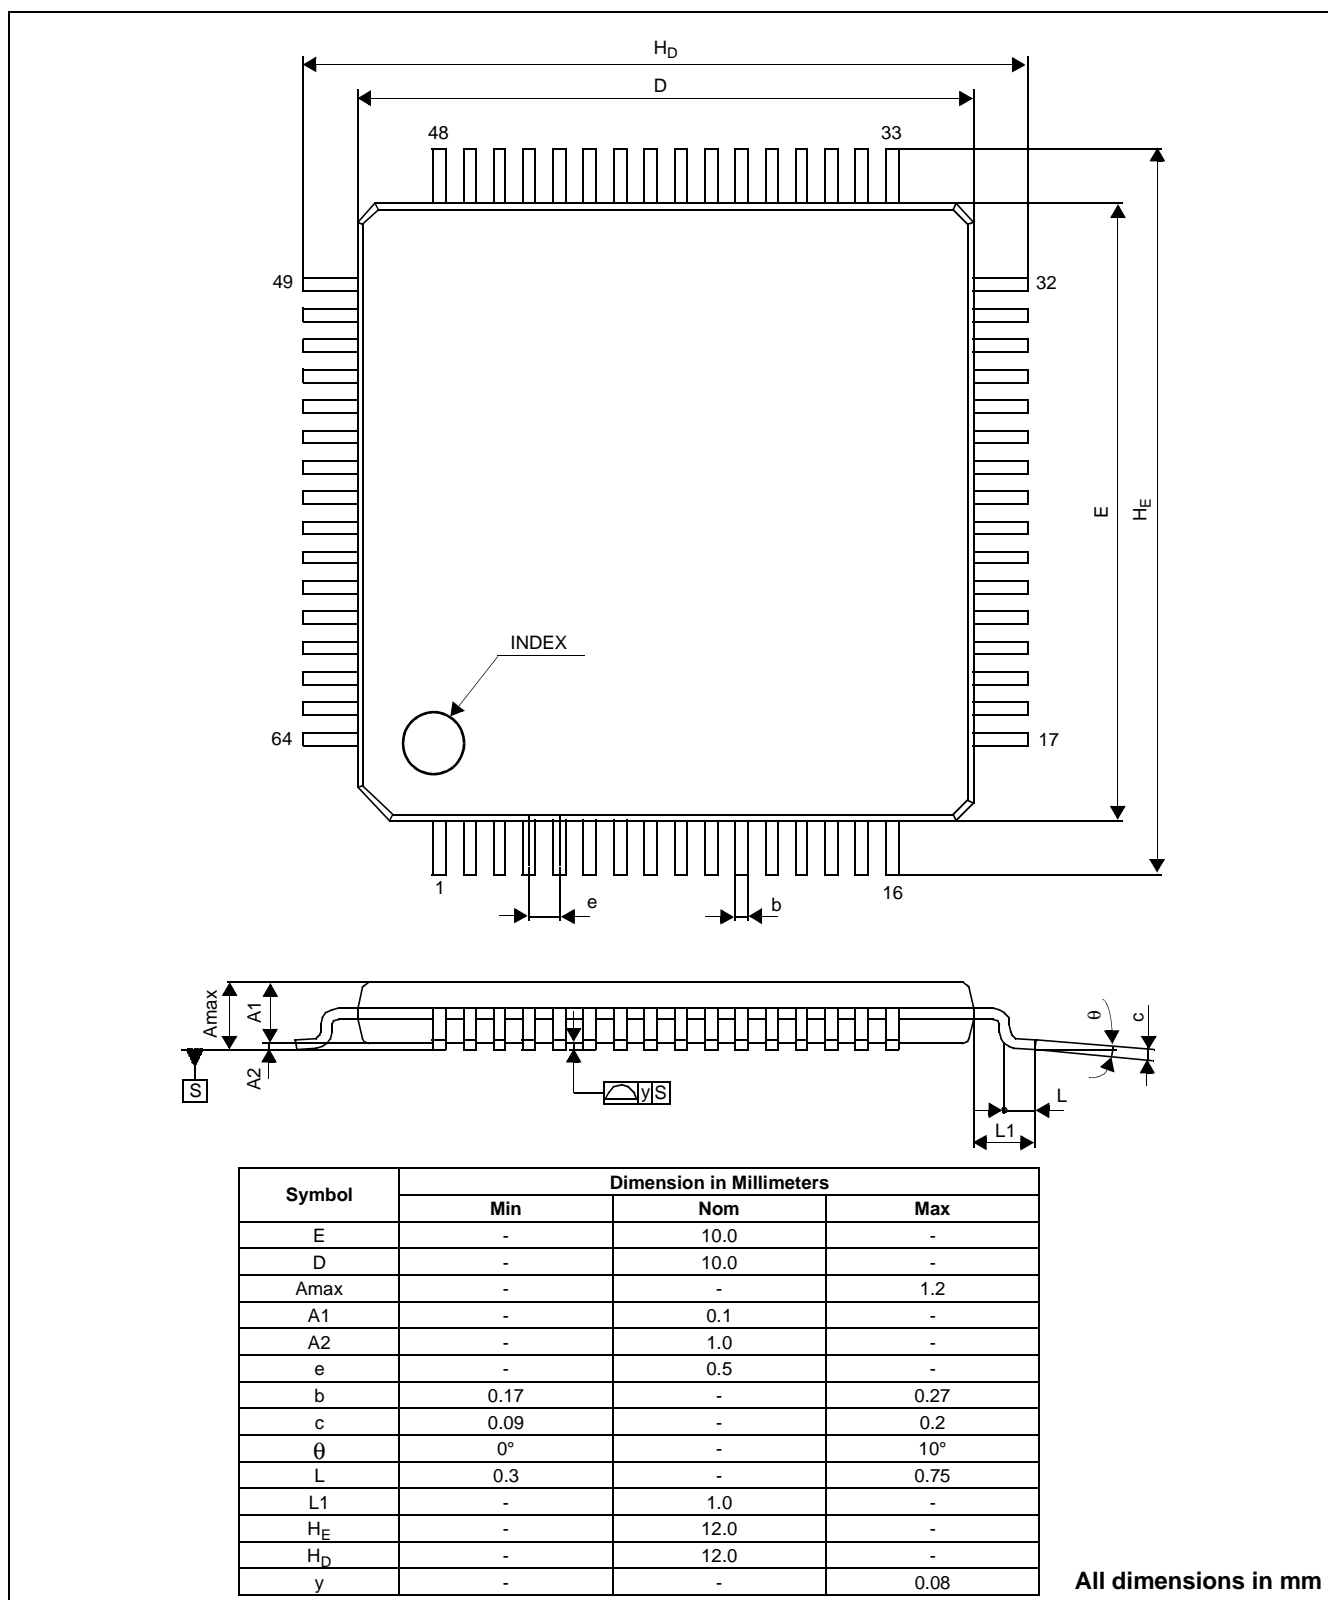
Mechanical Drawing TQFP13 - 64 pin
